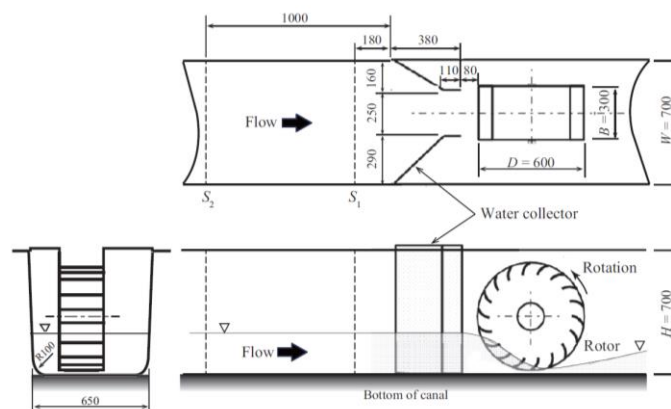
Geometry and dimensions of the open-type cross-flow hydraulic turbine
